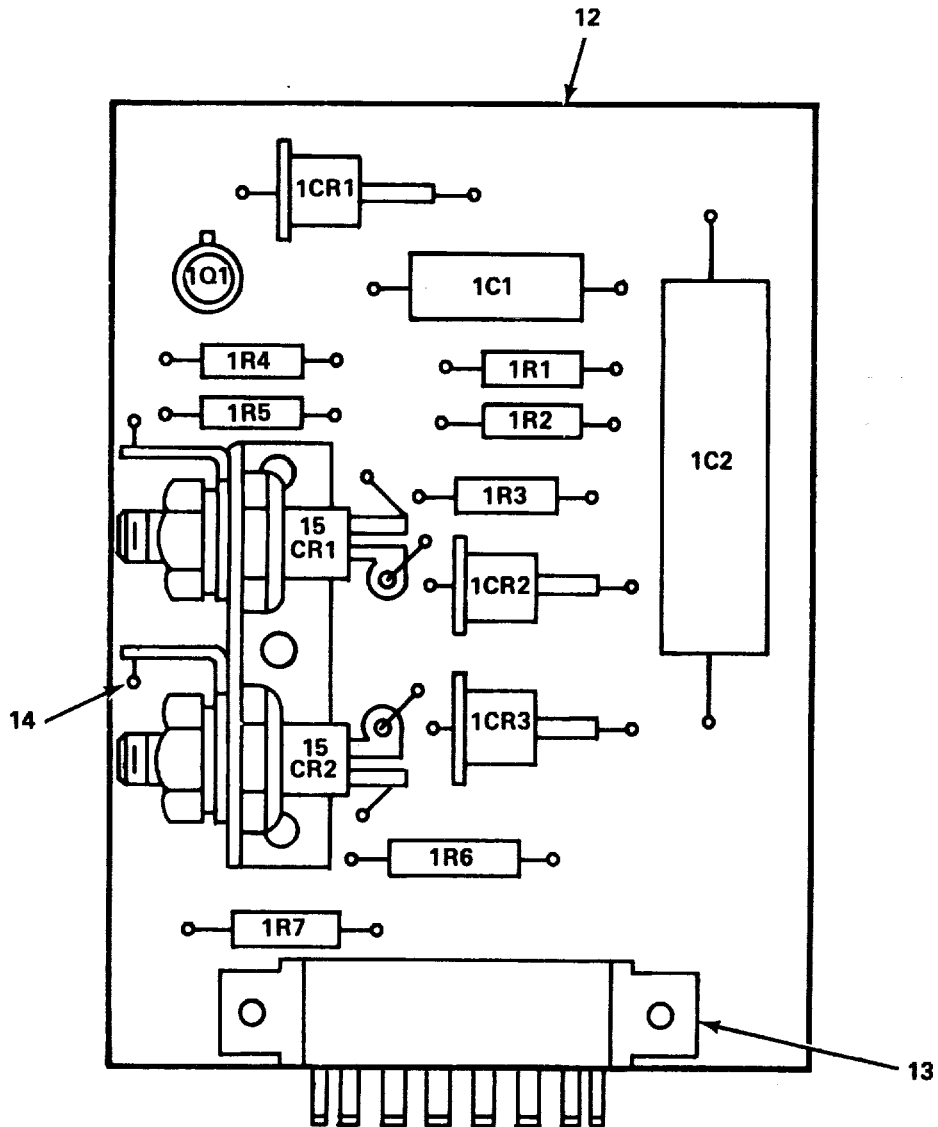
Blinker Assembly, Board No. 2, 1 703-1-3019GR2
